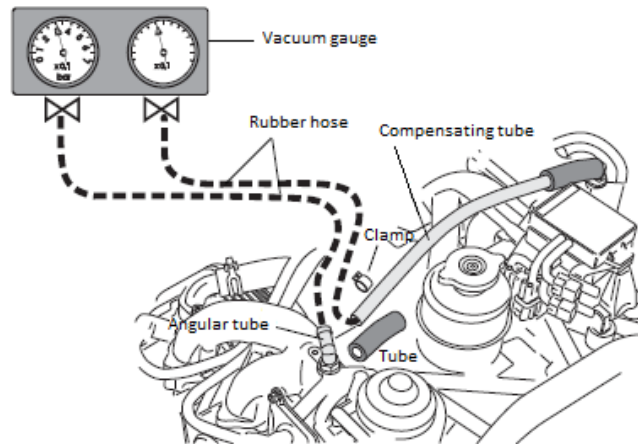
Setup for pneumatic synchronization option 2
